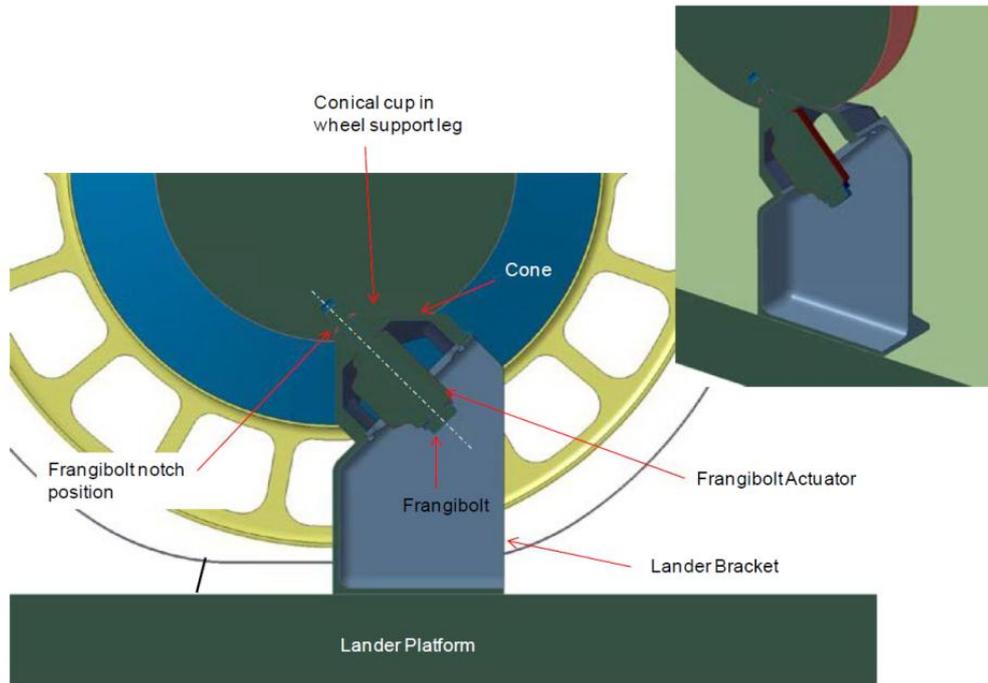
Front / rear wheel MarsFAST's HDRMs
